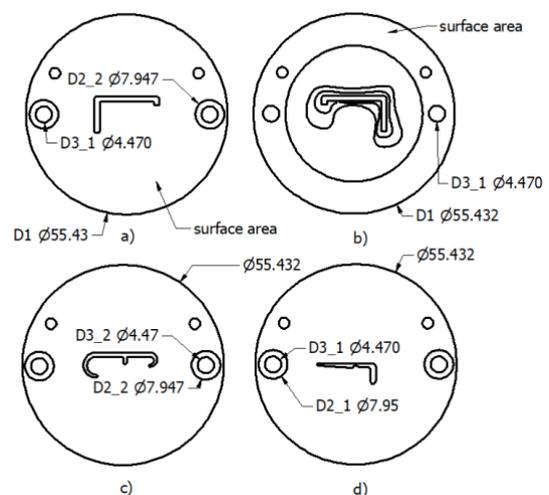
Extrusion die profile designs with main dimensions shown in mm: a) MEK01 Front, b) MEK01 Back c) MEK02, and d) MEK03
